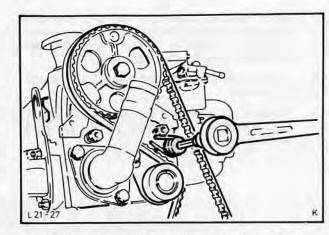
Slacken toothed belt tensioner using Special Tool 21–012
